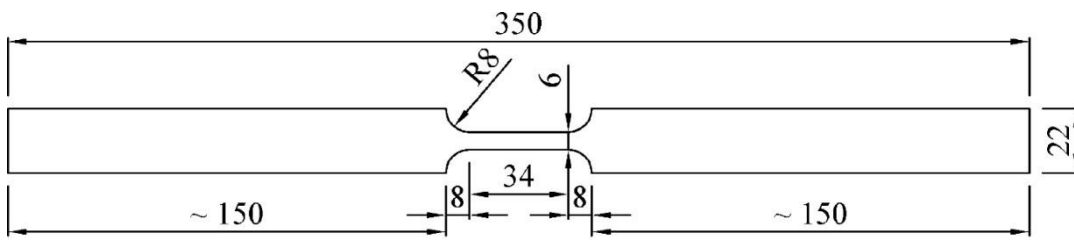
Dimensions (mm) of coupon specimen for elevated temperature tensile coupon tests
